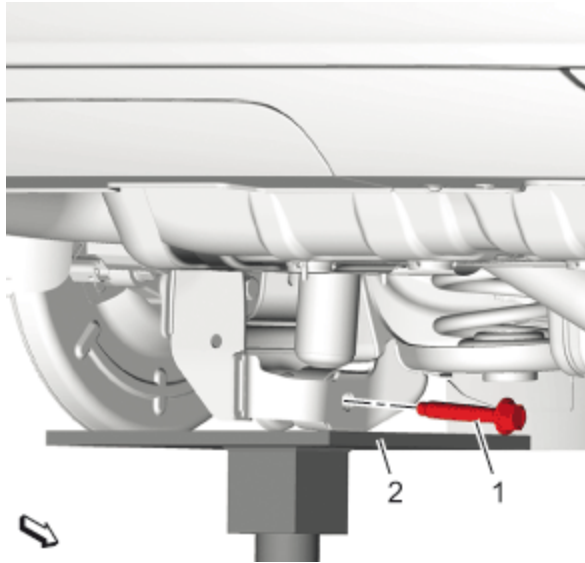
Rear Shock Absorber Bolt And Hydraulic Jack
